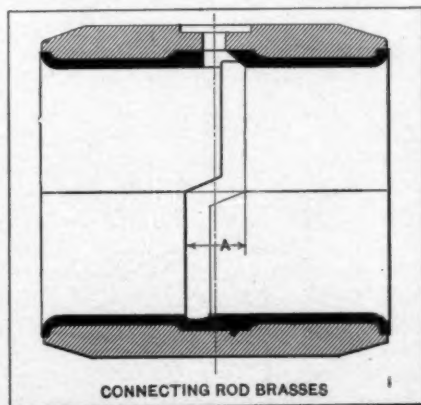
Connecting rod bearing, with white metal lining, designed for forced lubrication
